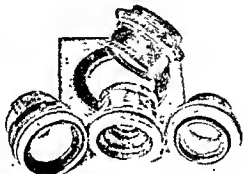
THE THREE LOWER LENSES CARRY SCREWED FLANGES TO FIT THE FLANGE OF THE UPPER ONE
